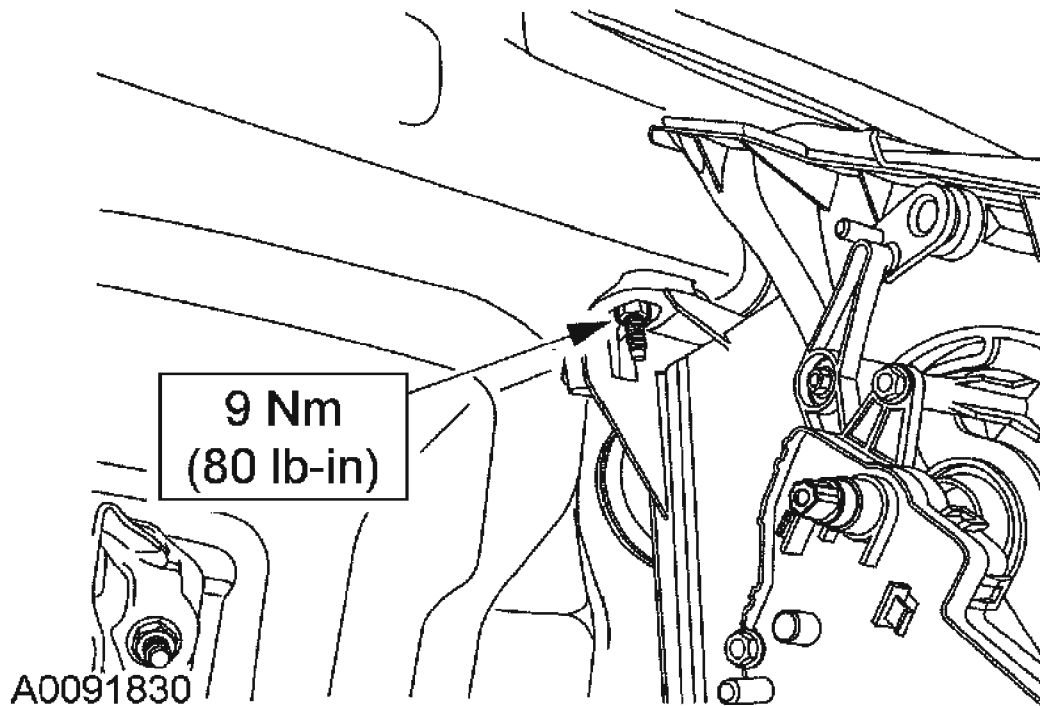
Removing LH Inner Heater Core And Evaporator Core Housing Nut
